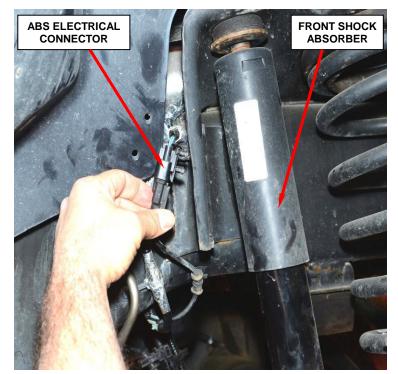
ABS Wheel Speed Sensor Electrical Connector
